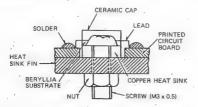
Installation Procedure for Flange-Mounted Ceramic-Encapsulated Transistor with Printed Pattern on the Upper Surface
